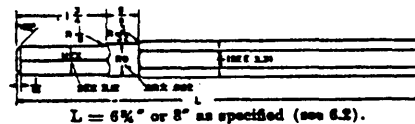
Type II, tool blank, hexagon shank, calking and chipping chisel.
